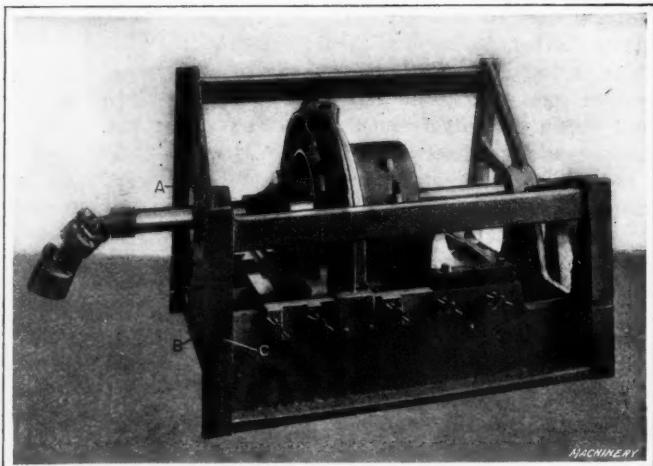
Triple Based Fixture used for drilling, boring and reaming All Holes in Carriage at Single Setting
